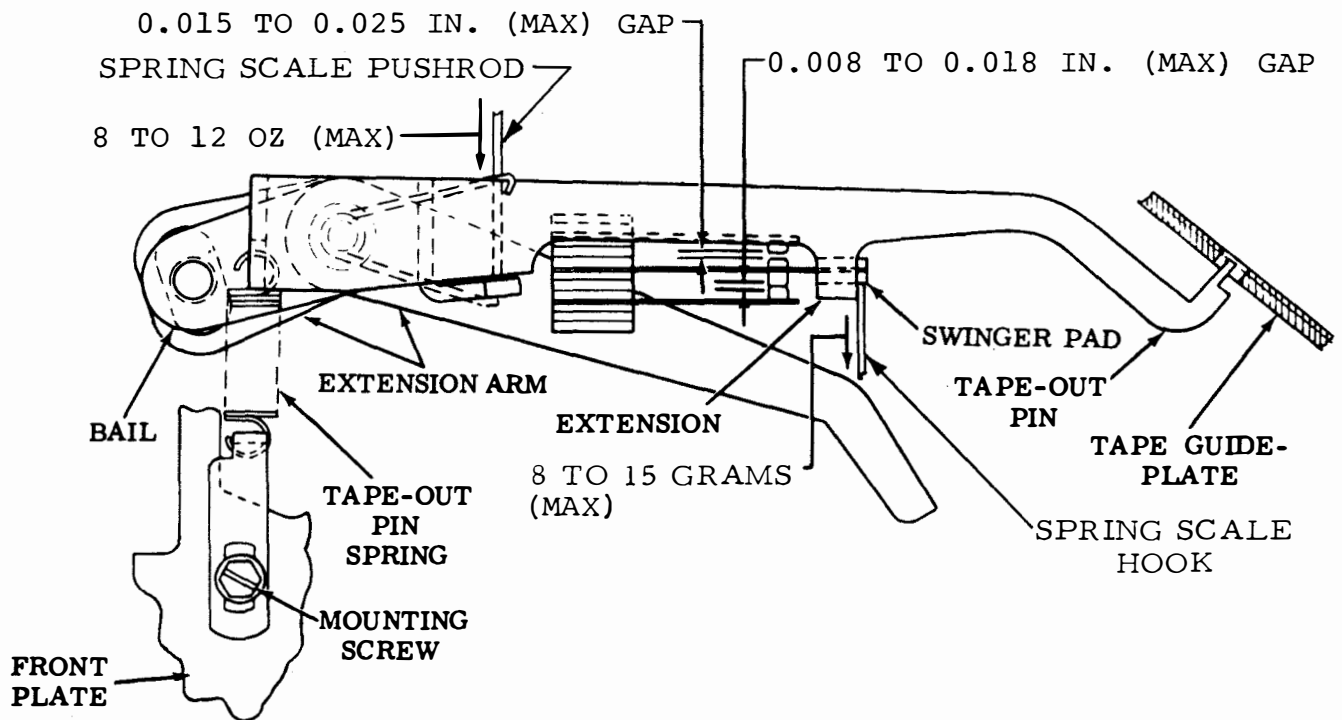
Tape-Out Contact and Tape-Out Bail torsion Spring, Front View
